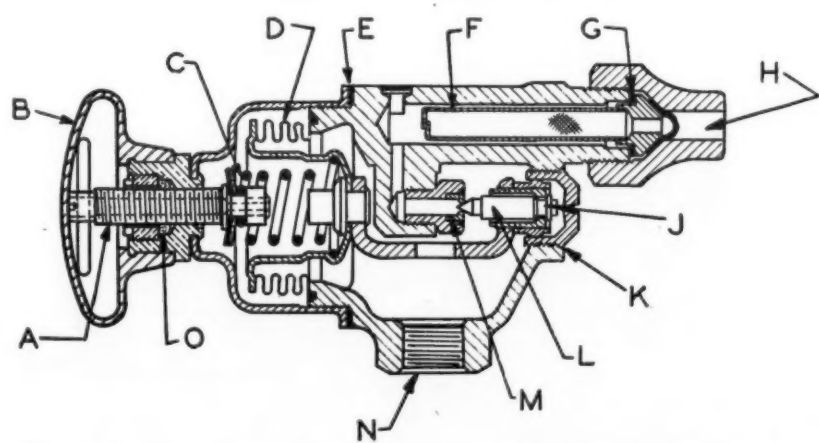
Cross section of Detroit Lubricator's automatic expansion valve. Lettered parts are as follows: A—Adjusting screw. B—Adjusting screw breather cap. C—Adjusting spring. D—Bellows. E—Moisture tight joint. F—Strainer. G—Copper gasket. H—Inlet connection 1/4-in. copper tube. J—Needle swivel. K—Plug hermetically sealed with solder. L—Stainless steel needle. M—Stainless steel seat. N—Outlet connection. O—Packing.
